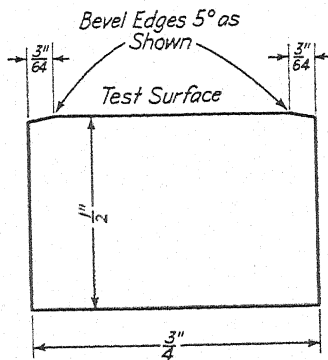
End View of Test Specimen (Adjusting Screw Hole Not Shown).
